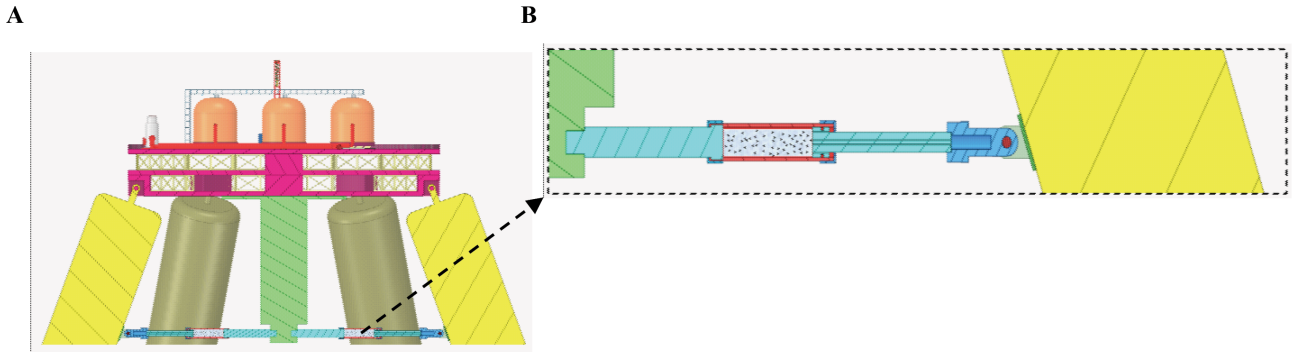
Magneto-rheological response control mechanism. (A) Vertical cross-section. (B) Enlarged view of the magneto-rheological assembly
